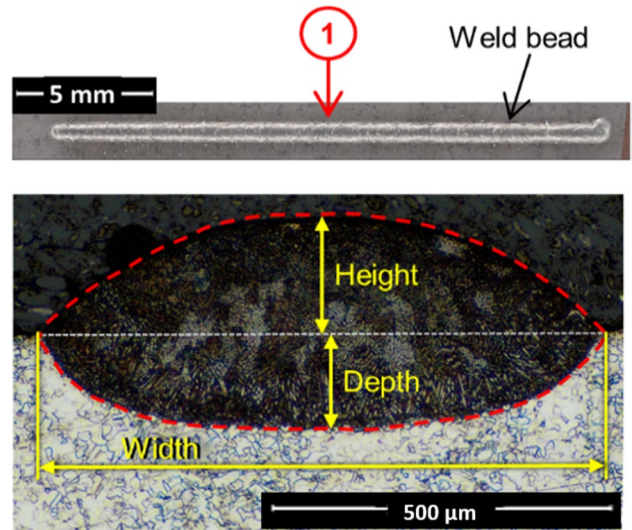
Cross-section of a weld bead deposited using parameters $P=250W$, $v=800$ mm/min and $Q=5.5$ g/min. The measurement positions (indicated by the red arrow) and geometrical dimensions were determined using an optical microscope
